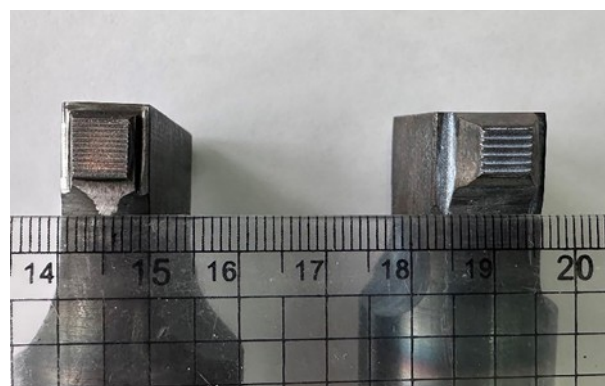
Photograph of welding tips used in ultrasonic welding:
